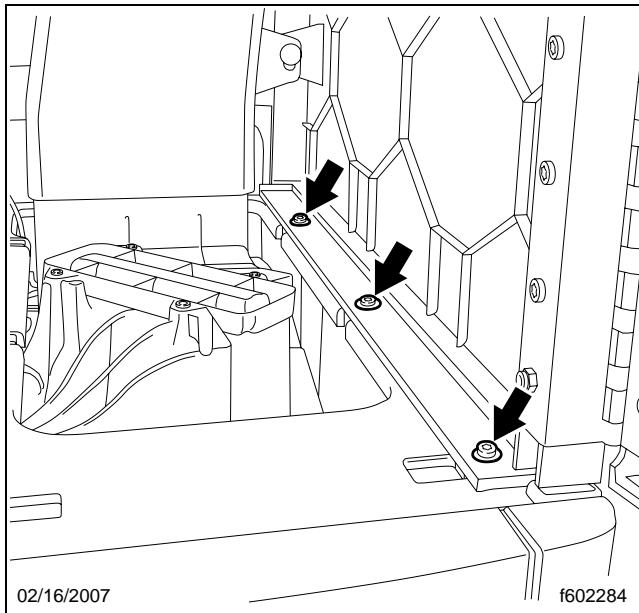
, Upper Cabinet-to-Auxiliary HVAC Housing Fasteners, Inside Cabinet
